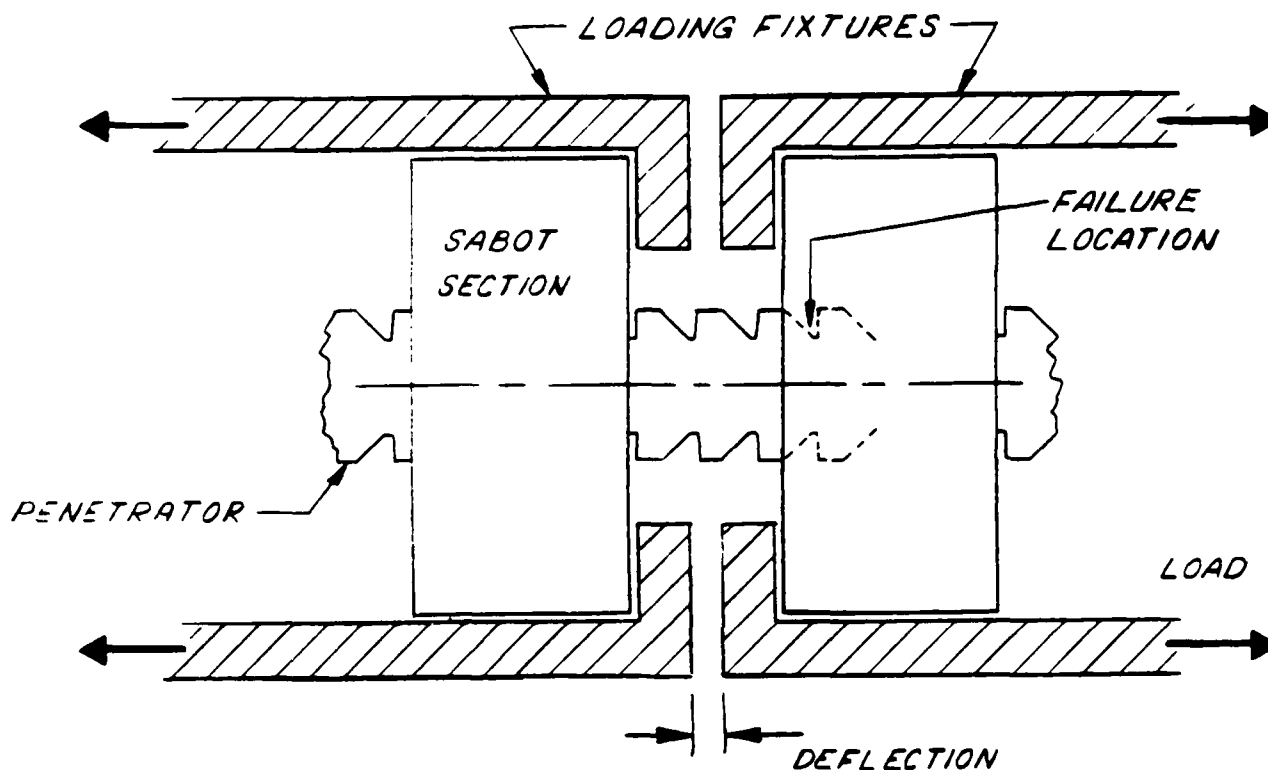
Sketch of arrangement for full-scale tensile failure tests of a penetrator.
